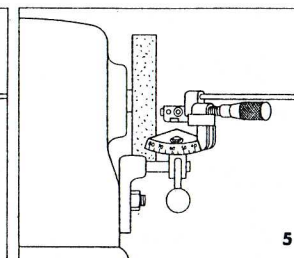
Attachment mounted on grinder frame. To mount, drill hole in frame and fasten adapter with bolt or stud.
